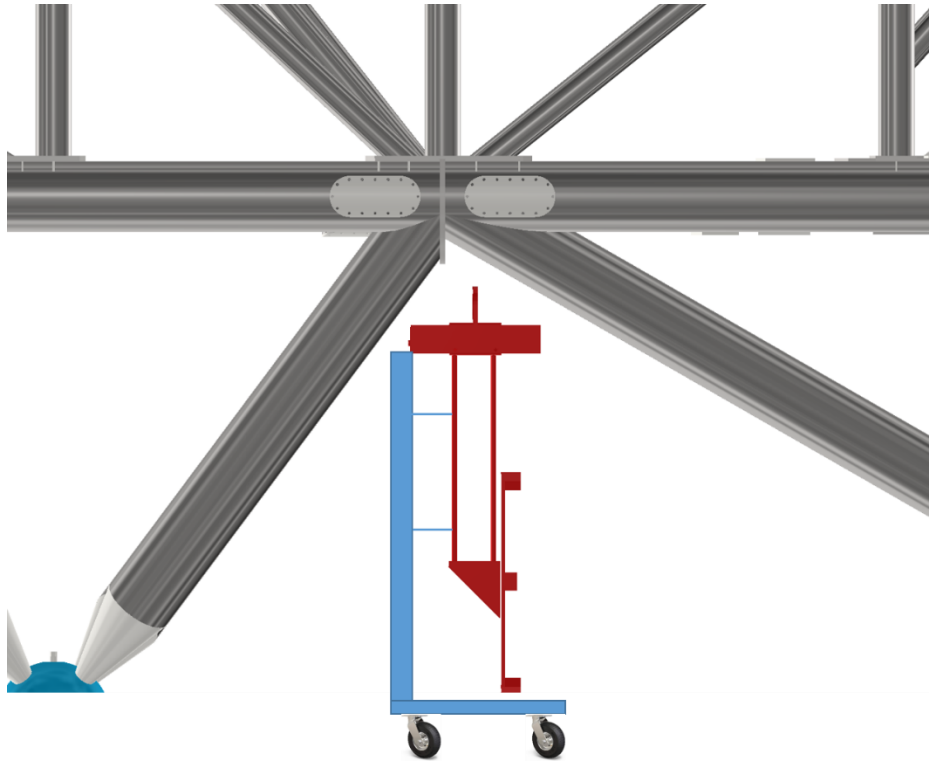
the small dimensions of the Schmidt Plate installation handling allow to access into the MMS from the bottom with the handling vertically oriented, ready to be picked by the crane hook.
